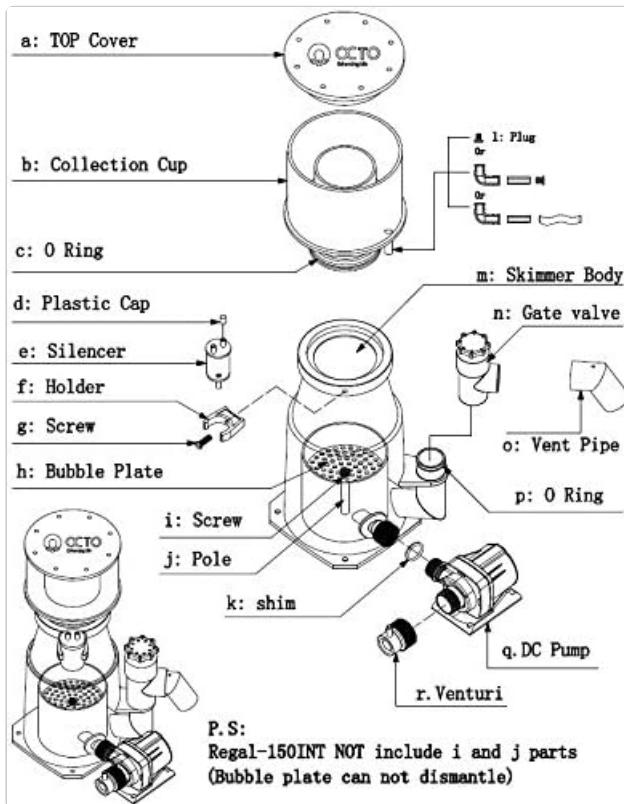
Exploded diagram showing all parts of the Reef Octopus Regal protein skimmer, including the top cover, collection cup, O-rings, plastic cap, silencer, holder, screw, bubble plate, pole, shim, skimmer body, gate valve, vent pipe, O-ring, DC pump, and Venturi. This diagram aids in identifying each component for assembly.
